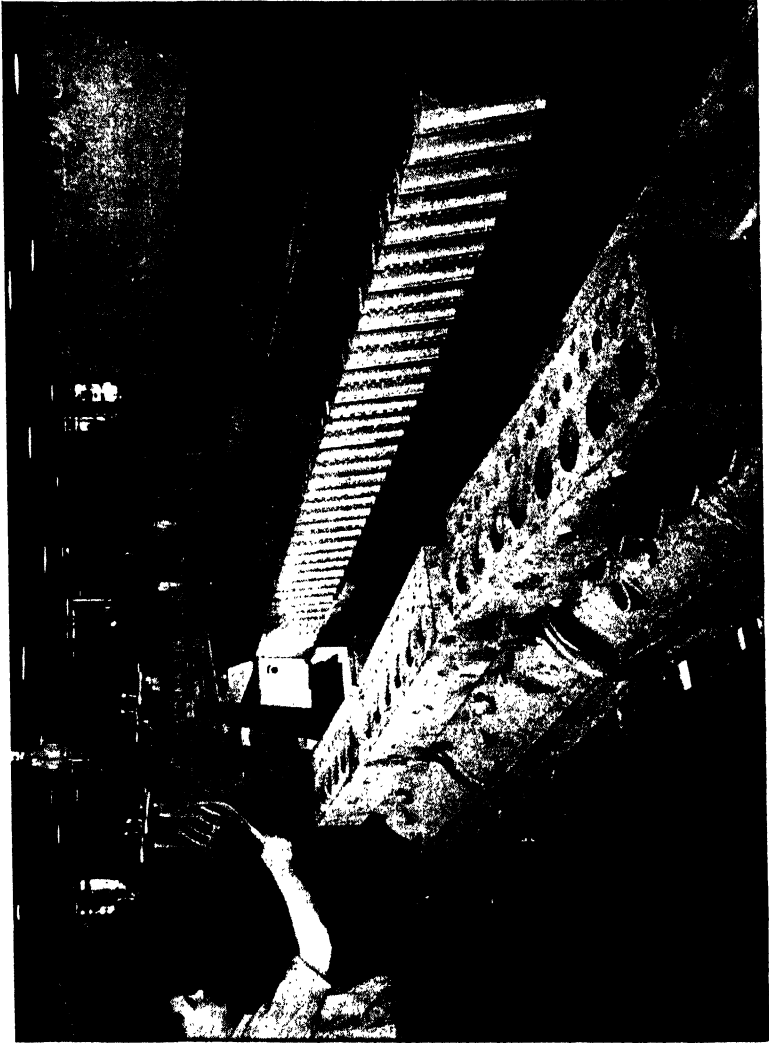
Cincinnati Machine for Surface Broaching Motor Block
